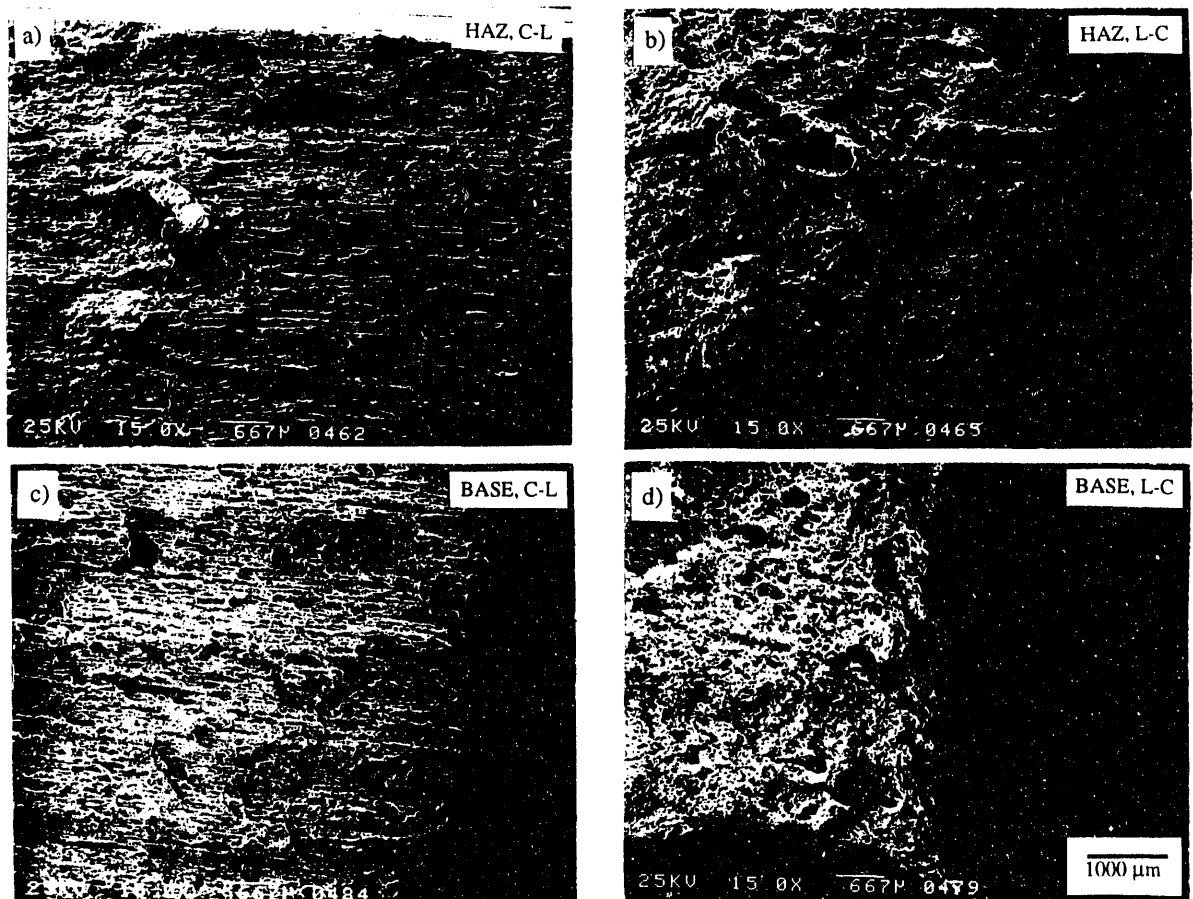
Fractographs of broken C(T) specimens cut from SRS archival piping ring 7, base and HAZ components: a) Specimen 7HA12; b) 7HA4; c) 7BA15S; and d) 7BA18S.
